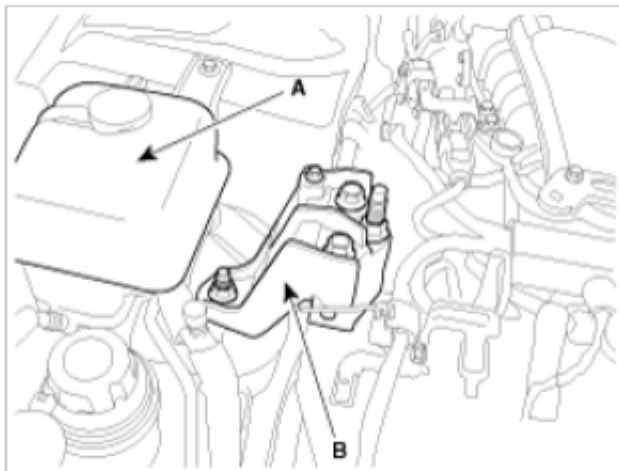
Identifying A/C Pipe Bracket Mounting Bolt
